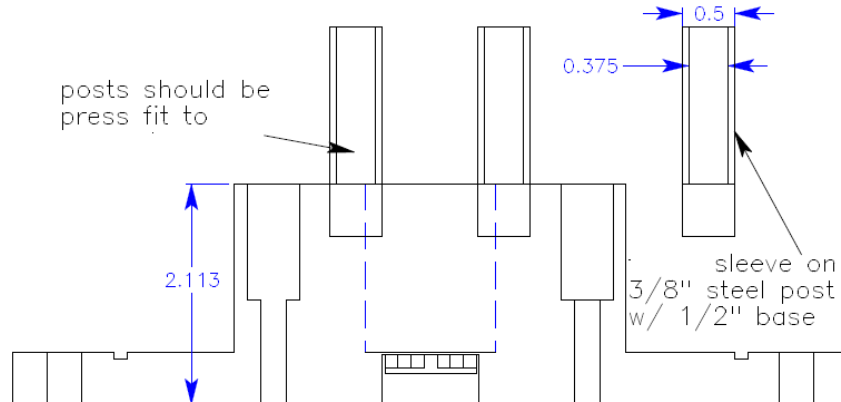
Bottom flange of the fluid collection chamber with the translation guide posts.
